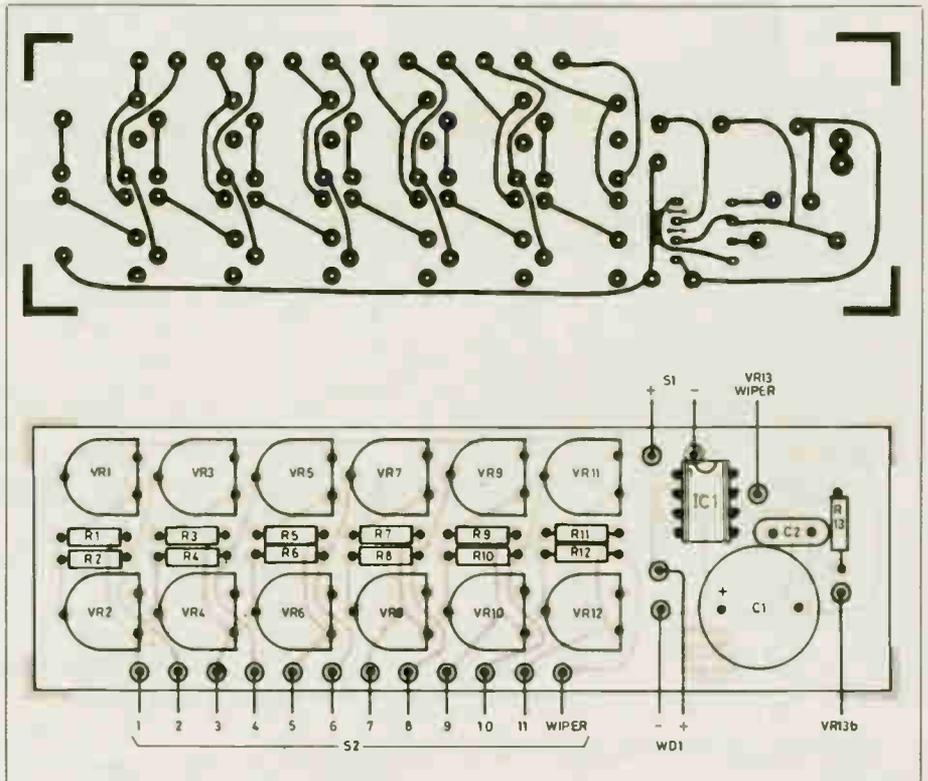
The PCB (top), and the parts overlay, shown actual size.
